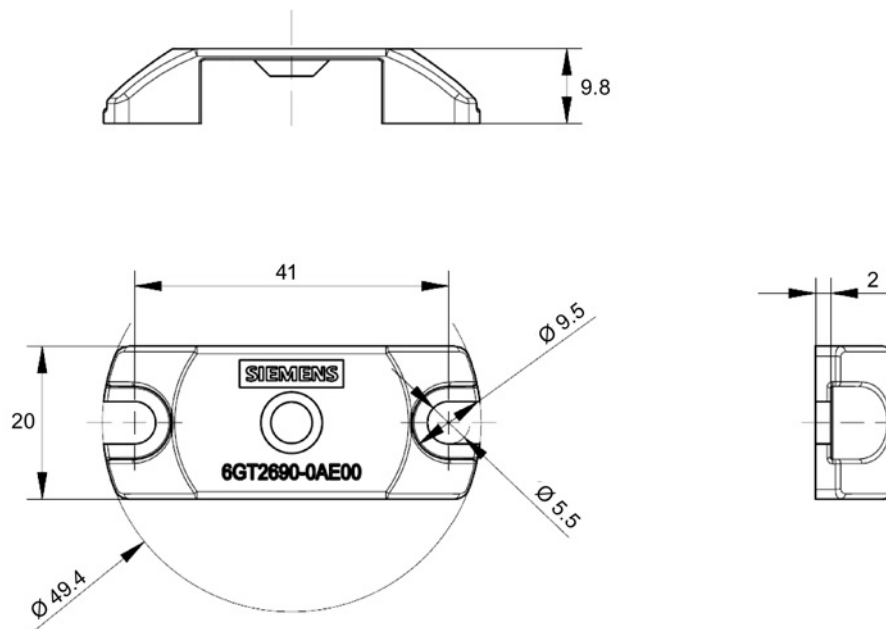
Dimension drawing of fixing hood 6GT2690-0EA00
